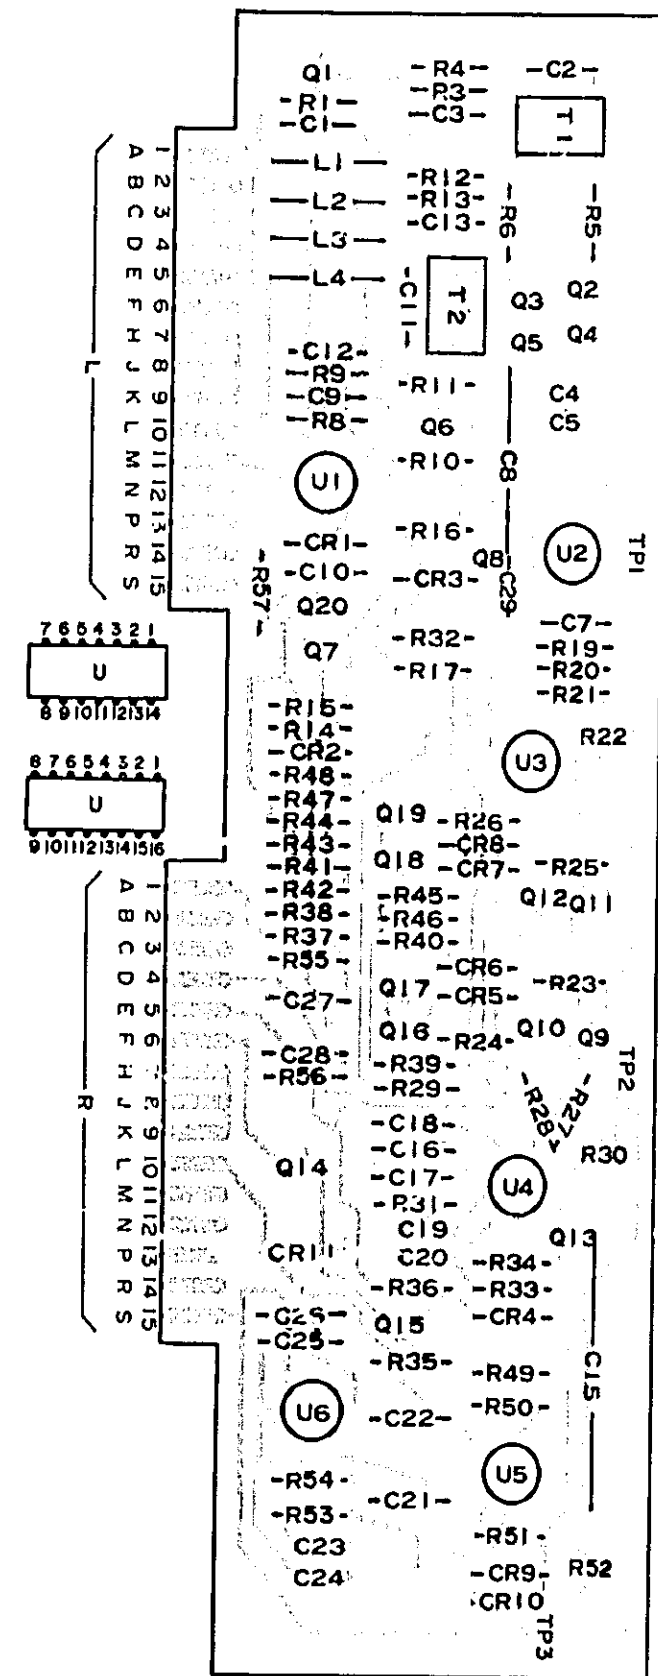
A7 G/R Synchronous Detector &amp; Integrator Board Assembly Component Locations.
